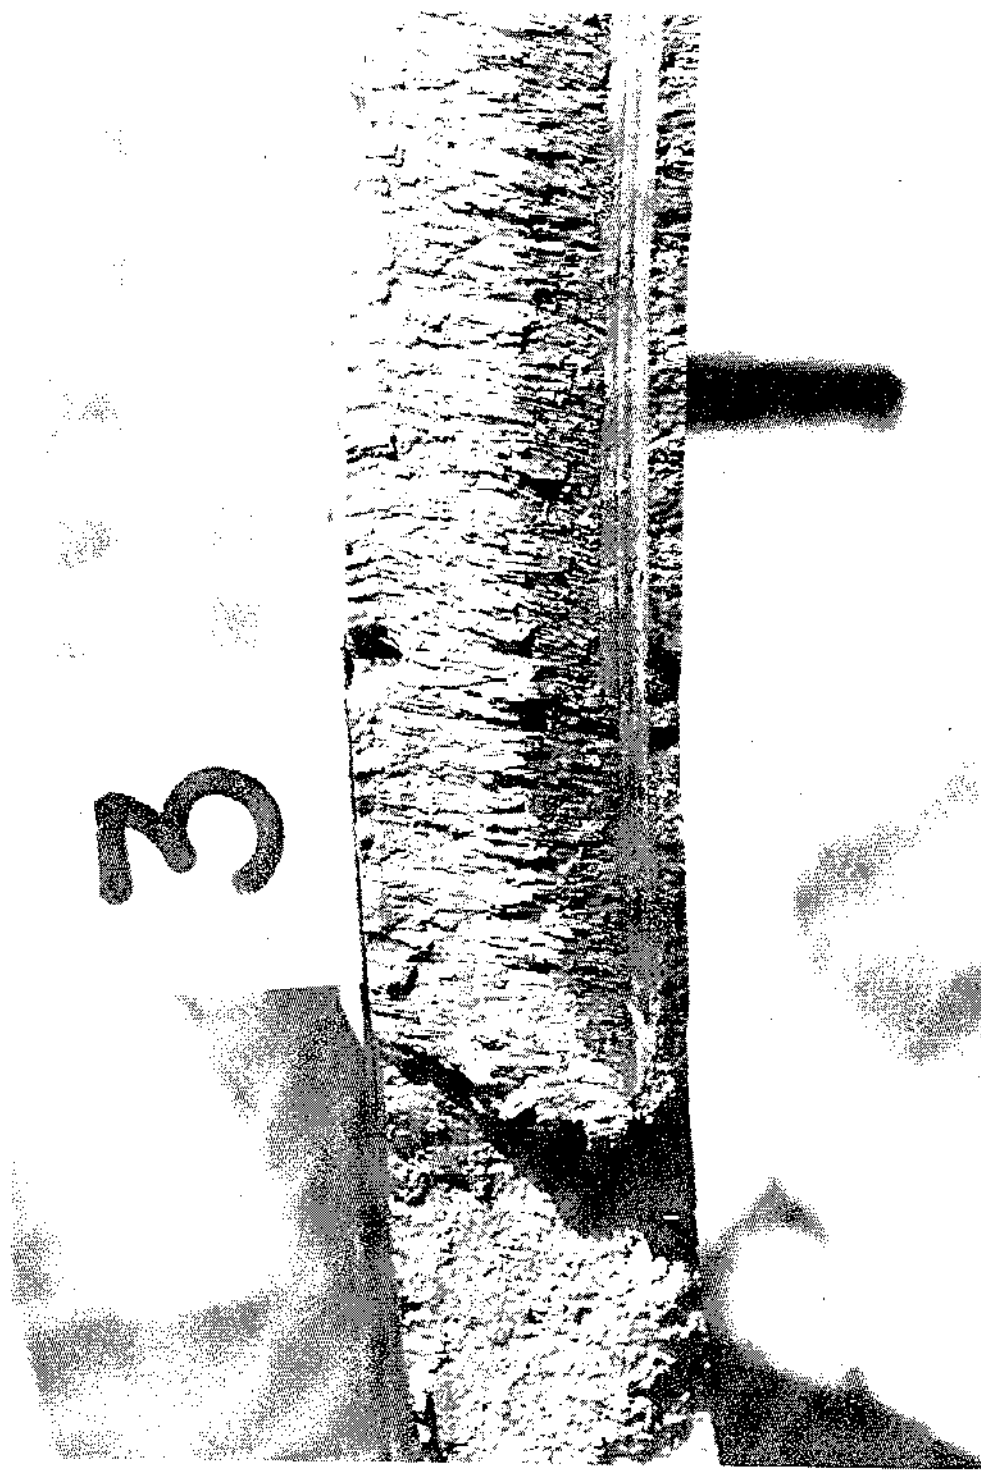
Cross section of broken weld of HK cast-alloy tube.
